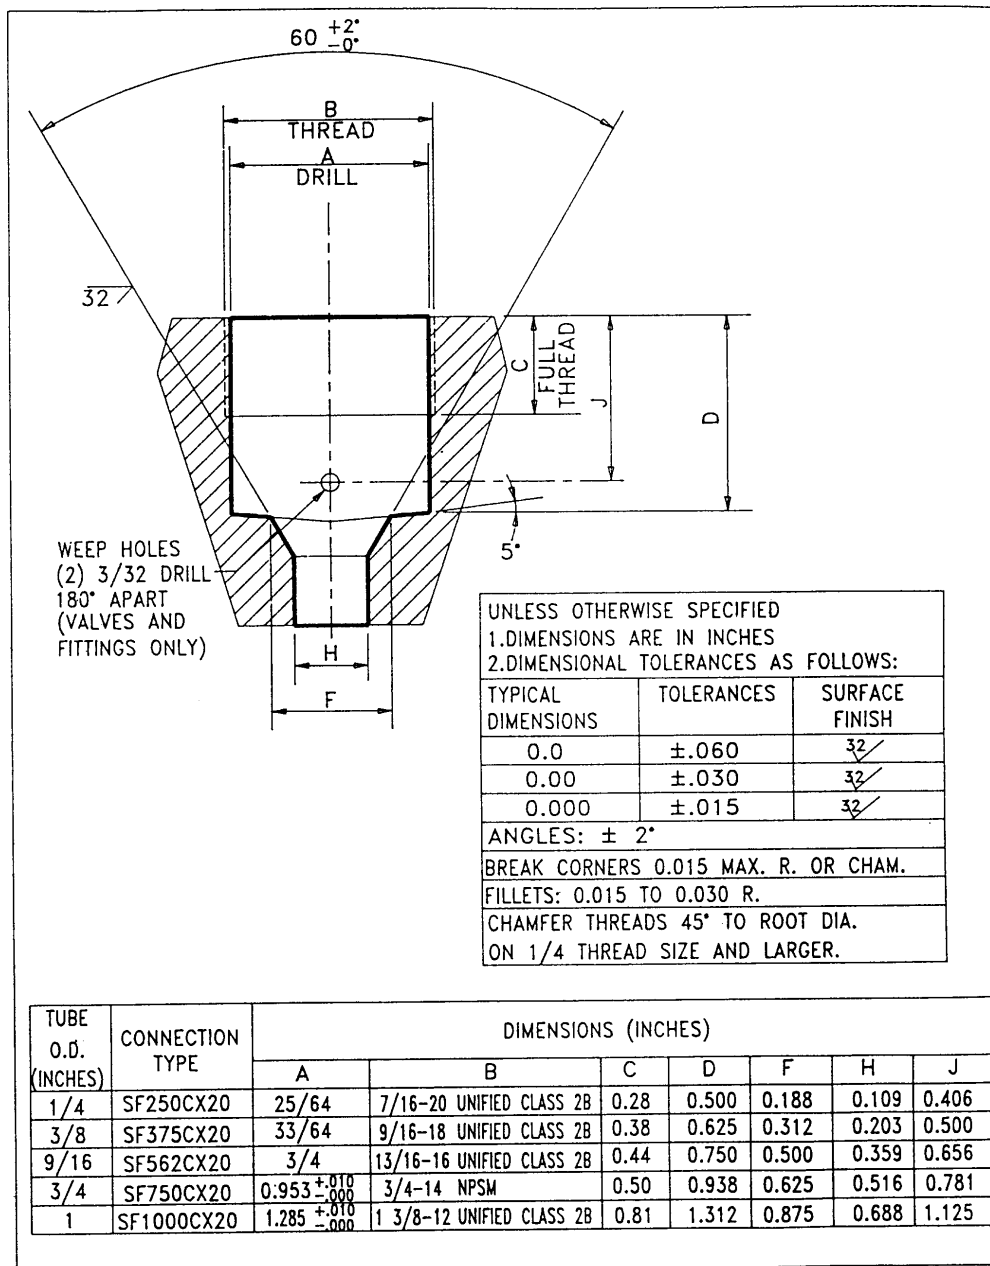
20,000 psi Rated Coned & Threaded Tube Fitting Female End Connection Details
